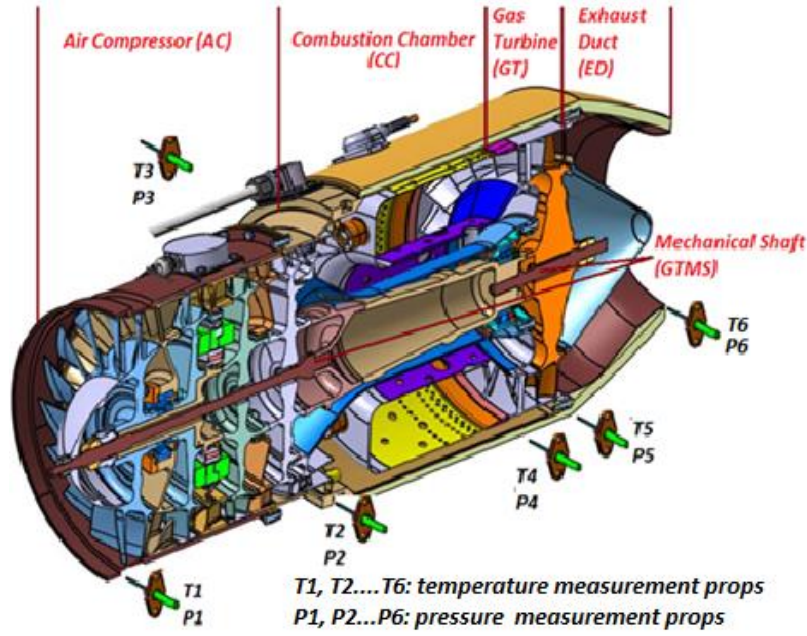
The cutaway of the turbojet engine (TJE) and measurement devices [31].
